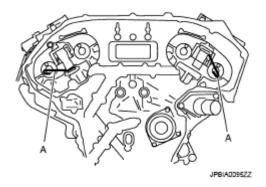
Pressing Plunger Of Timing Chain Tensioner Using Stopper Pin Courtesy of NISSAN MOTOR CO., U.S.A.
